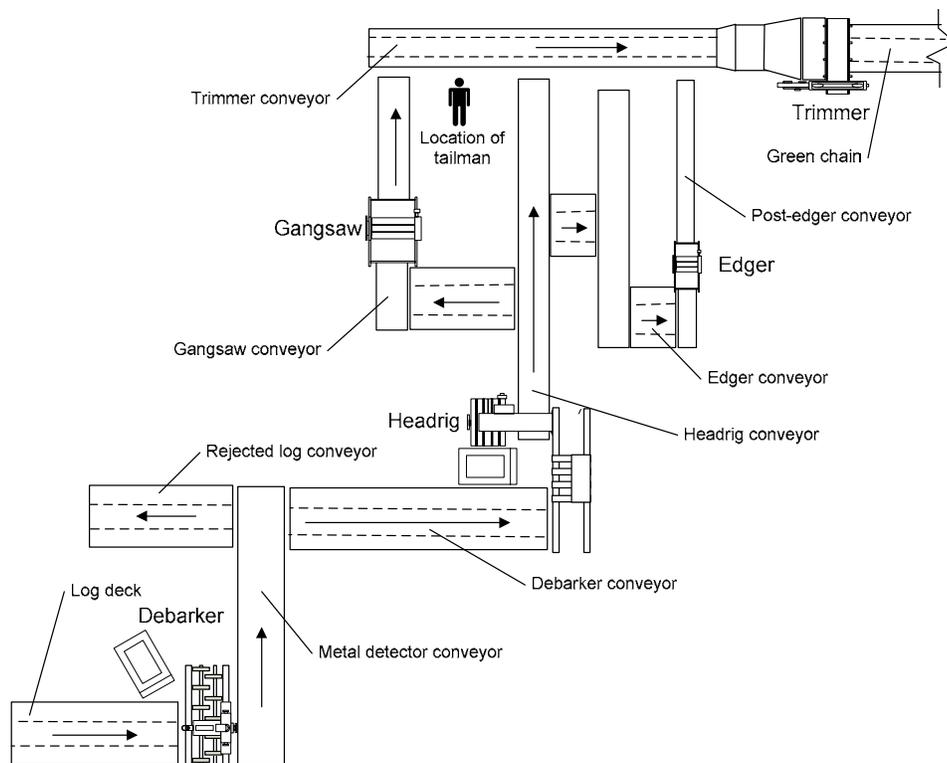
Machine and conveyor layout at the medium volume sawmill Machine and conveyor layout at the medium volume sawmill
